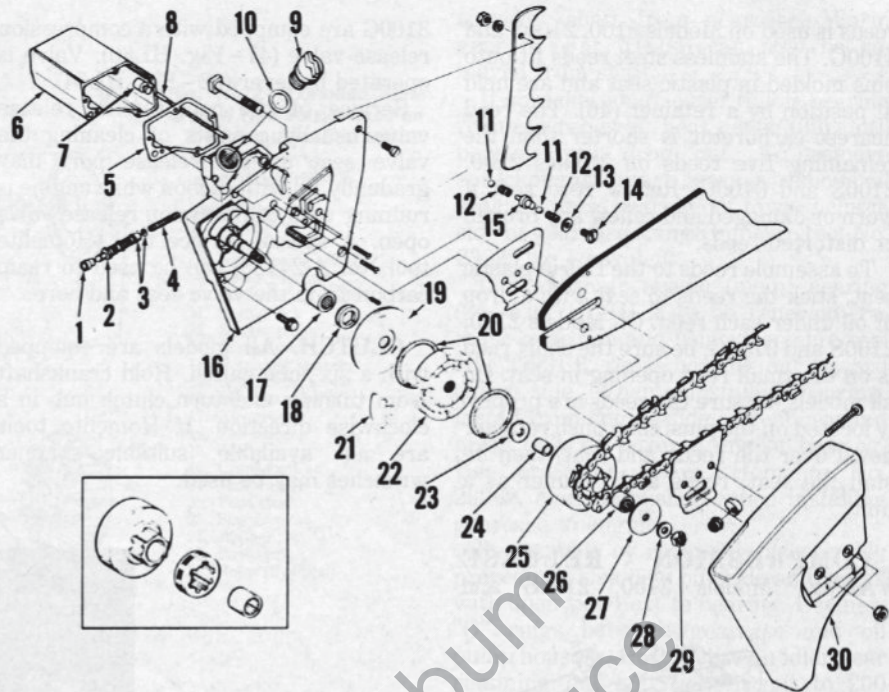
Exploded view of direct drive clutch and related parts used on C-72 models. C-52 models will be similar. Inset shows the other available splined type sprocket and drum.
